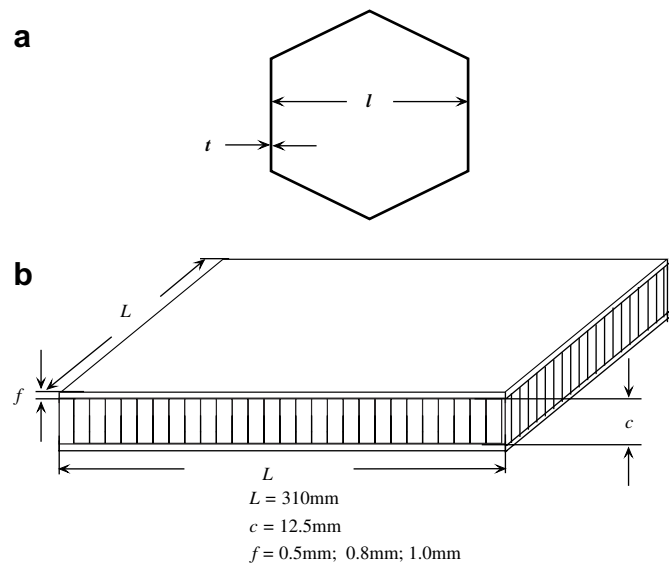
Geometry and dimension of the specimen: (a) geometry and dimension of a single cell; (b) geometry and dimension of a square sandwich panel.
